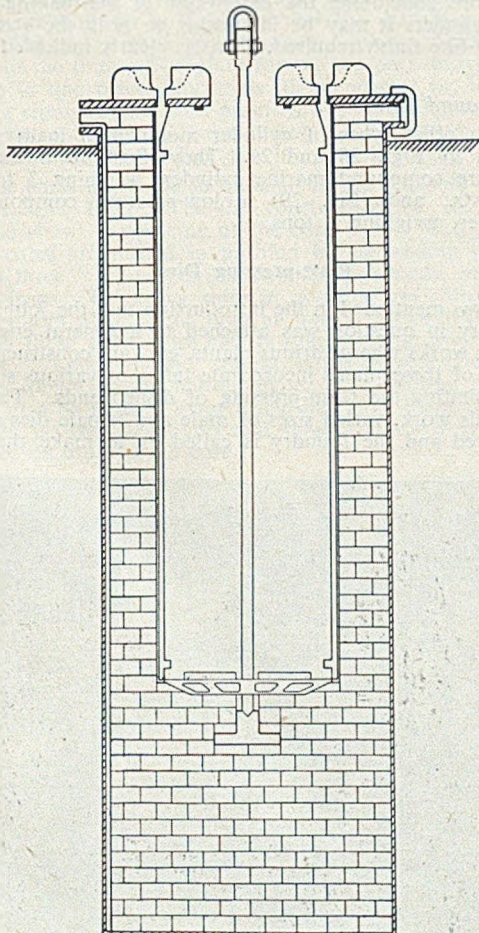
MOULD FOR A PAPER-DRYING CYLINDER CASTING.
